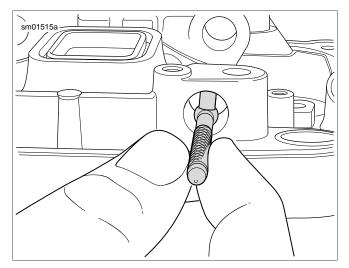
Measuring Rocker Arm Shaft Bore Diameter in Inner Rocker Cover
